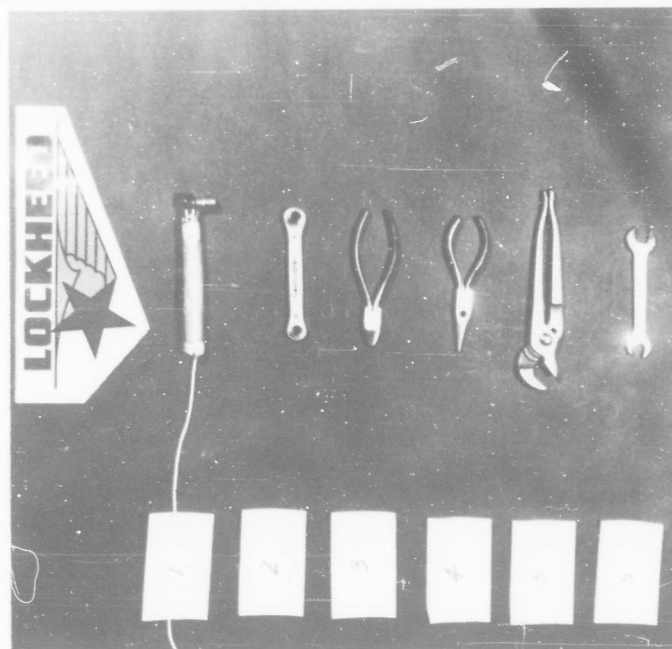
TOOLS FOR FUEL CELL REPLACEMENT
